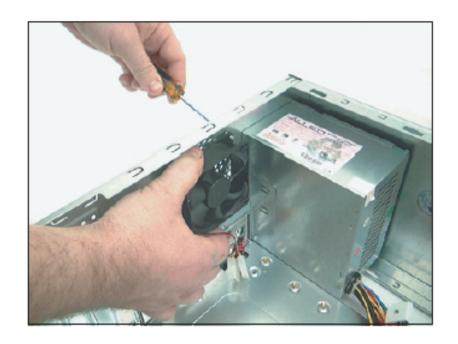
Install one exhaust fan on the rear of the case to help pull air through the case
